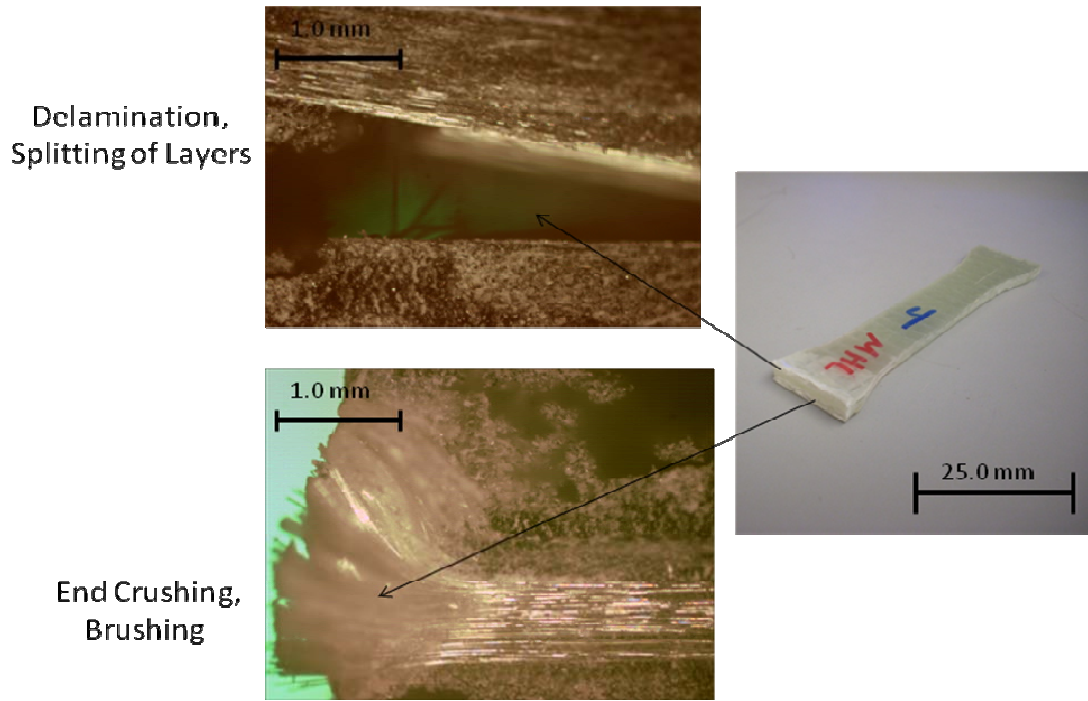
Failed MHL Compressive Specimen with Enlarged Views of End Failure
